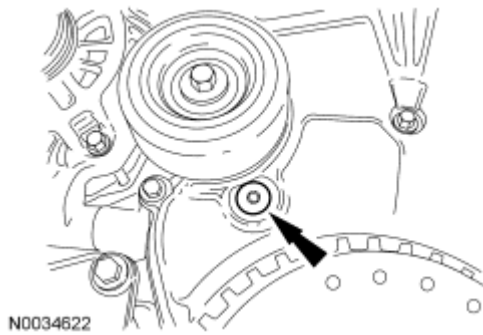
Locating Lower Front Cover Timing Hole Plug
